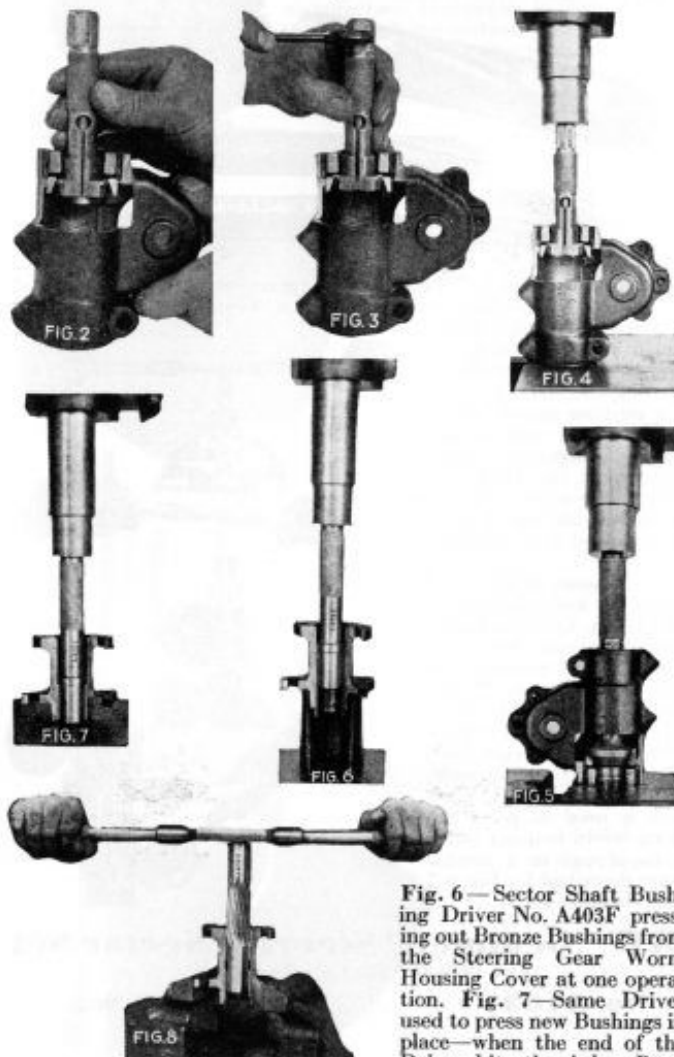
Sector Shaft Bushing Driver No. A403F pressing out Bronze Bushings from the Steering Gear Worm Housing Cover at one operation. Fig. 7—Same Driver used to press new Bushings in place—when the end of the Driver hits the Arbor Press Bed, the first bushing is OK.
